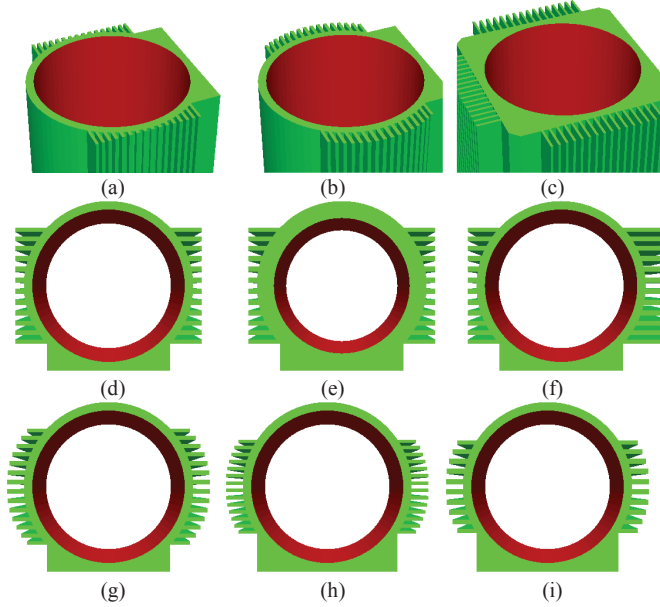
(a), (b), and (c) Three non-standardized housing types. (d) Front view of 1st housing type. (e) Reduction of housing inner radius. (f) Increase of width of right fins. (g) Front view of 2nd housing type. (h) Reduction of aperture of fins. (i) Reduction of number of fins.
